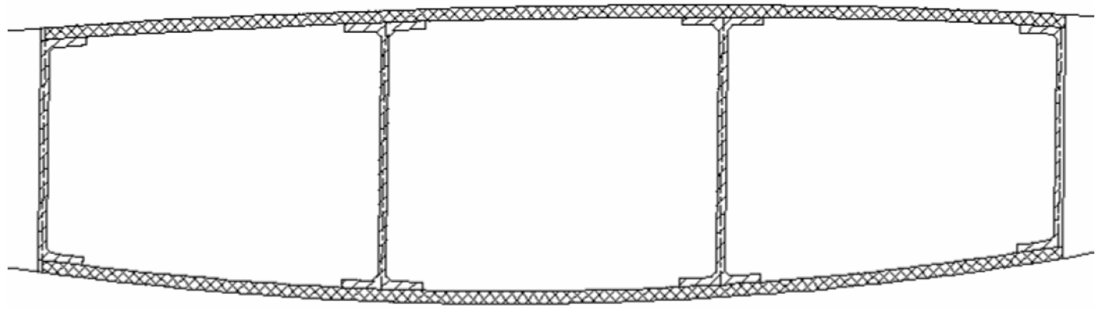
Composite multi-spar structural layout with monolithic panels without reinforcement
